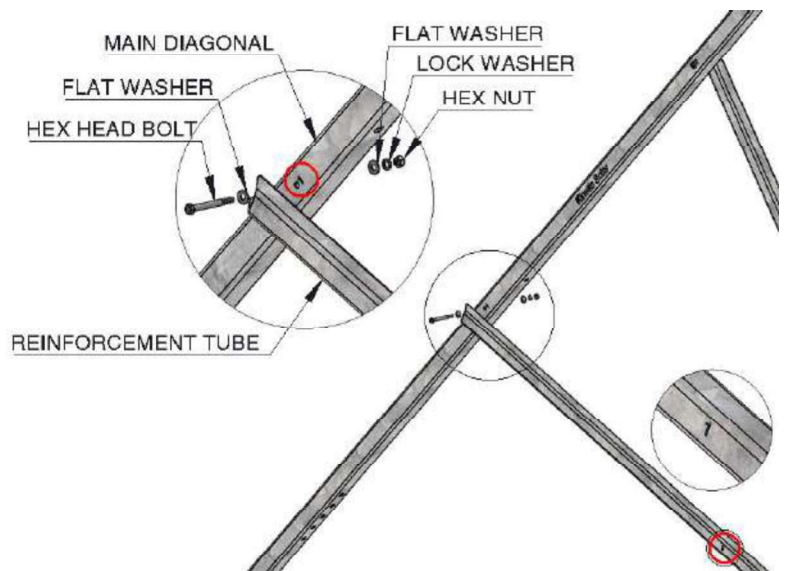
Reinforcement Tubes onto A-Frame Main Diagonal
